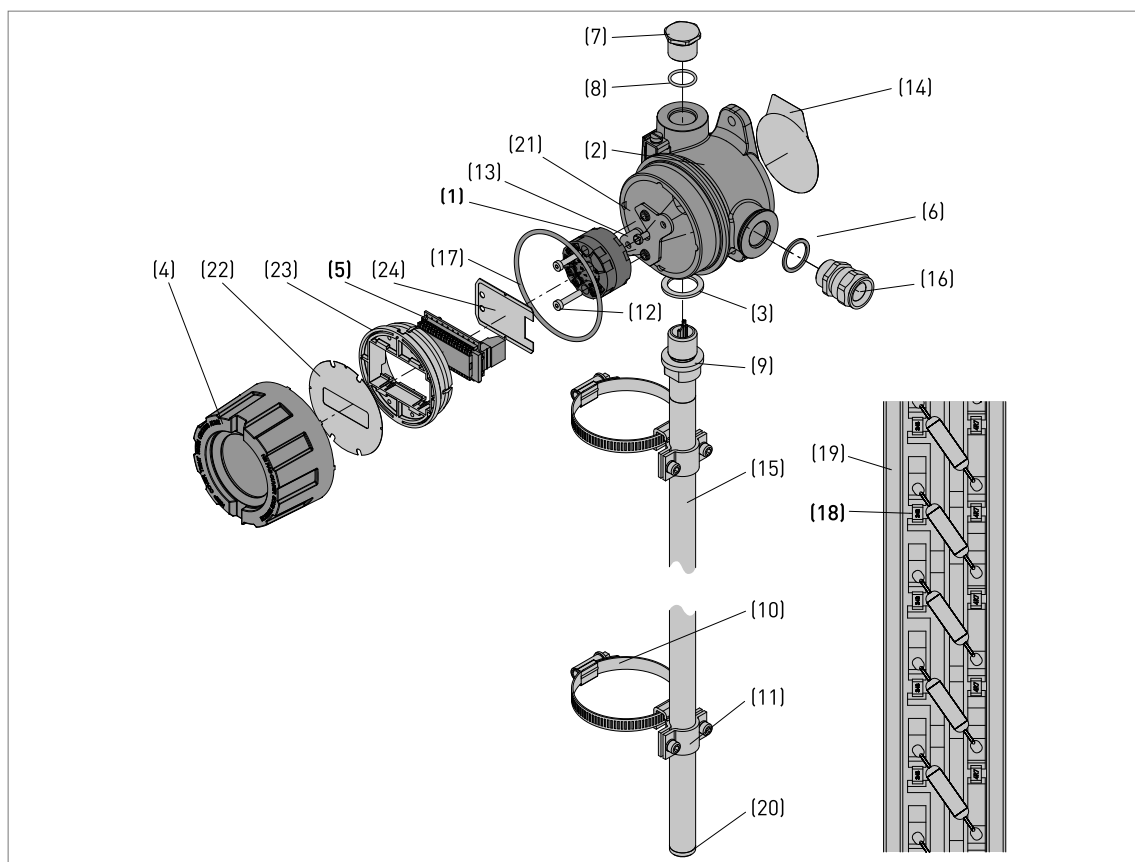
LT40 C - parts of the device (refer to "Parts list" table)
